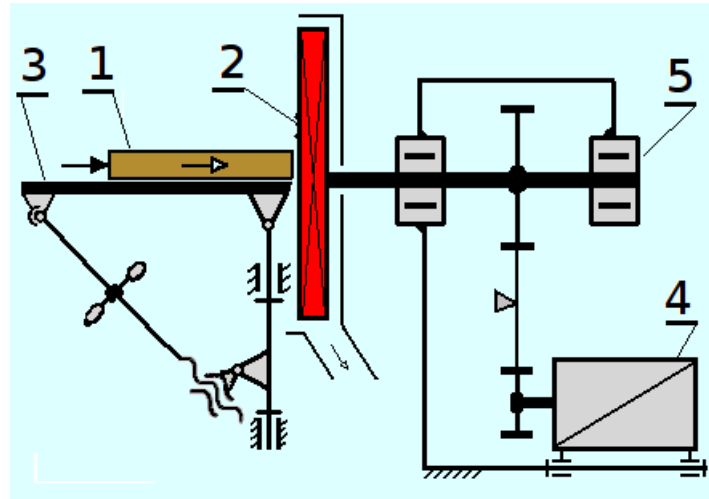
Scheme of the test stand on disc sanding machine: 1 – Wooden specimen; 2 – Sanding tool; 3 – Machine table, adjustable; 4 – Electrical motor; 5 – Bearing
